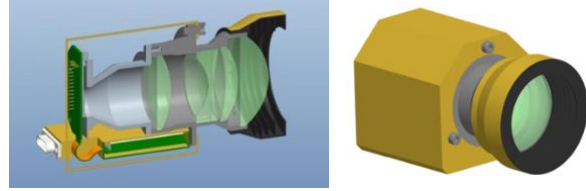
LUMIO-Cam opto-mechanical assembly (left) and external box (right).
